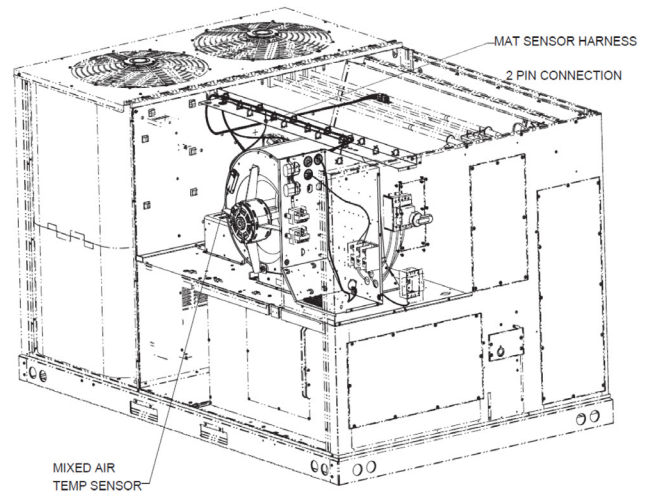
INDOOR FAN SECTION/MIXED AIR SENSOR
